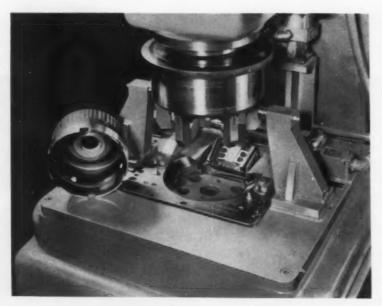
Close-up of slot-chamfering and deburring tool equipment of machine shown in Fig. 1
